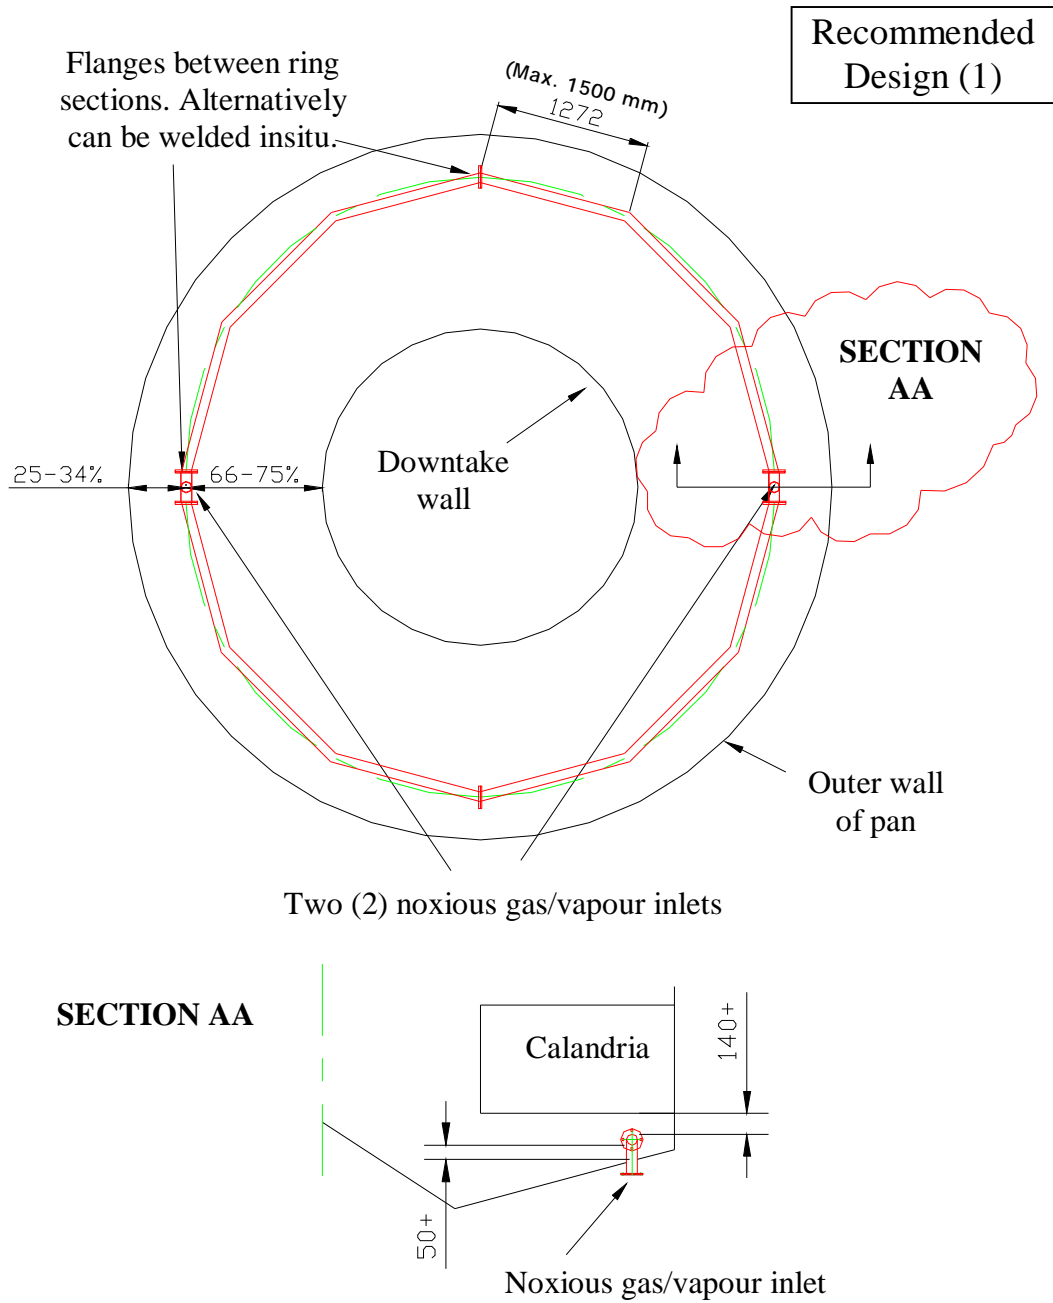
Preferred (recommended) arrangement for the Jigger Tubes installed in a batch pan.
